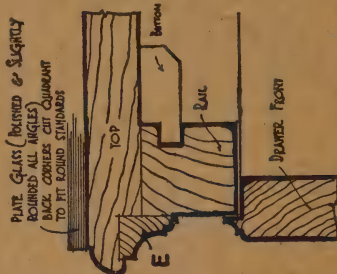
Detail of Drawer-front and Mouldings to Top
